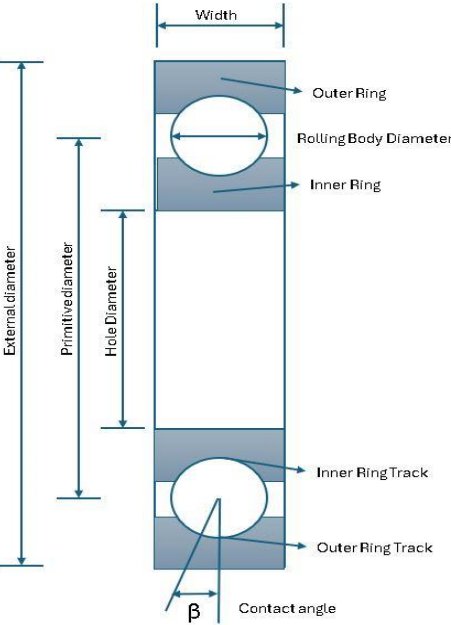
Fixed ball bearing: constituent elements and dimensions.
